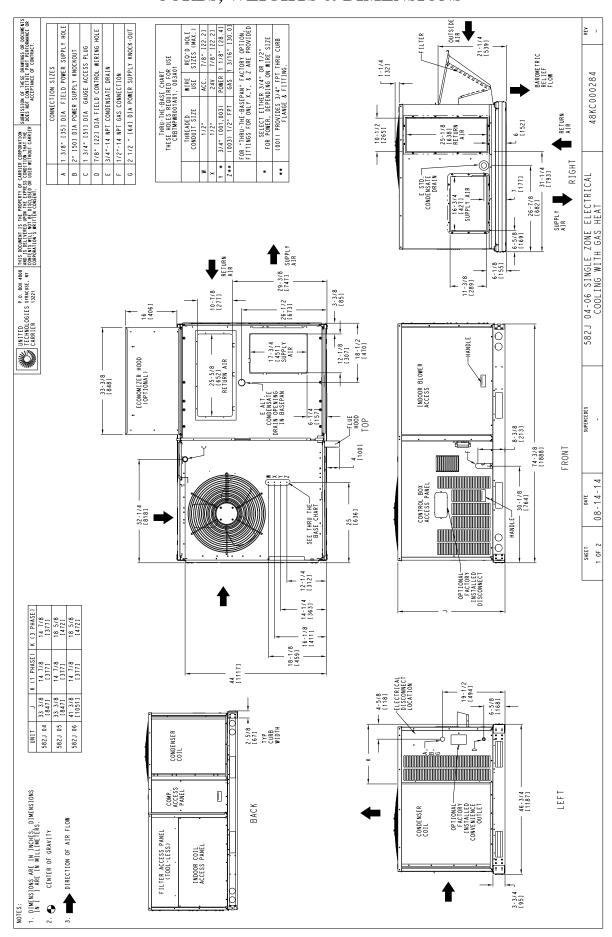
Dimensions 582J 04-06 (sheet 1 of 2)
